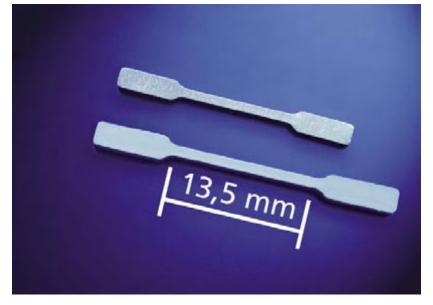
Micro tensile test specimen: Green component and sintered component.
